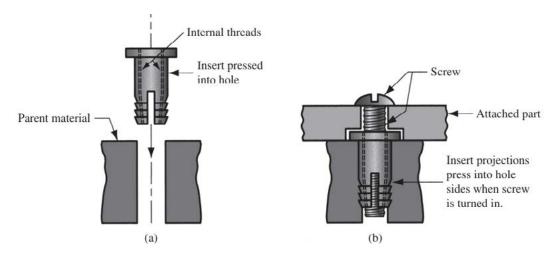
Screw thread inserts: (a) before insertion and (b) after insertion into hole and screw is turned into the insert (Groover, 2021).
